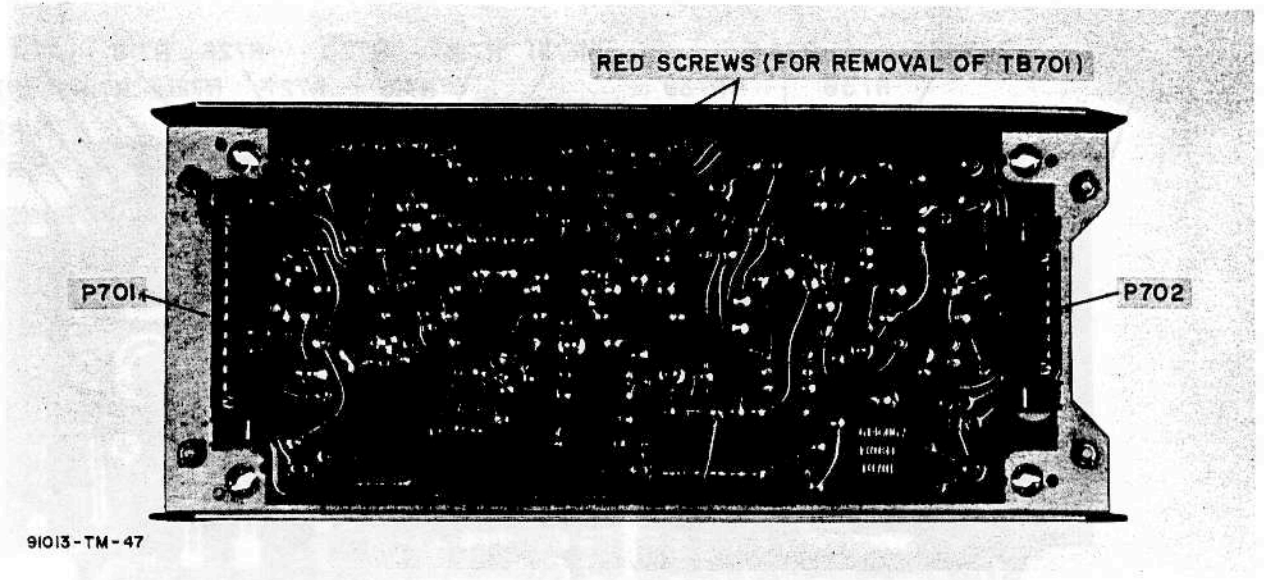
AF Amplifier, Bottom View with Cover Removed
